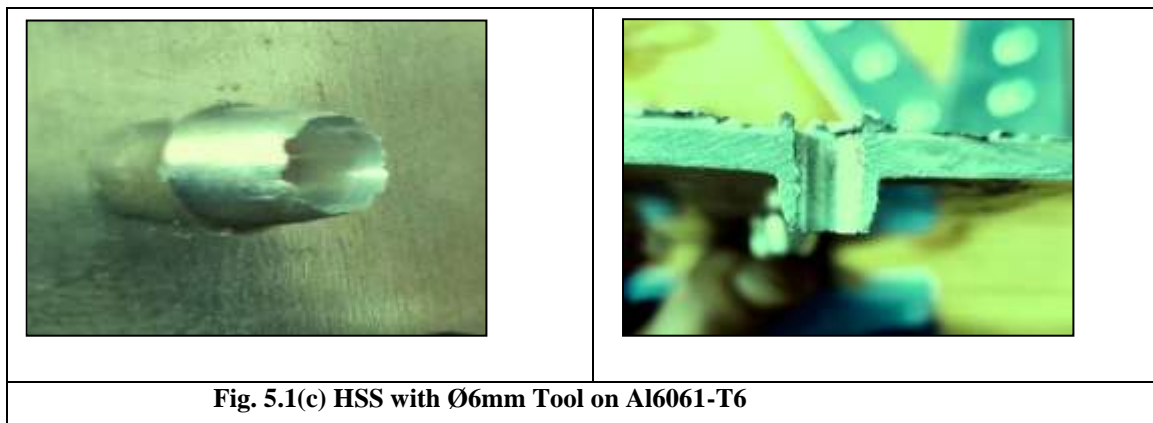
(c) HSS with Ø6mm Tool on Al6061-T6
